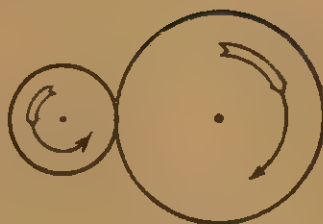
Sectional diagram of friction transmission in a sewing machine
